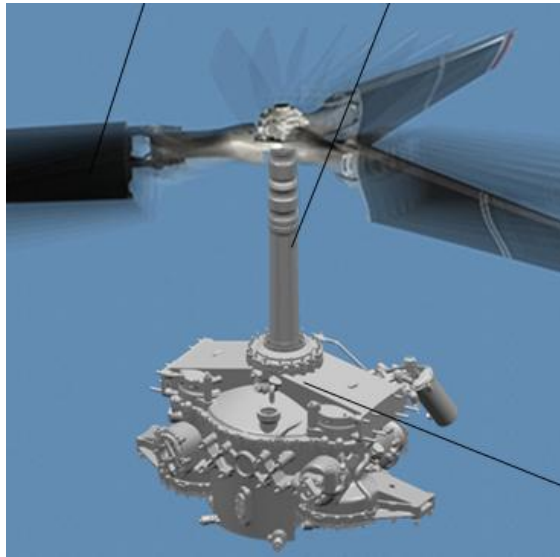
Schematic showing typical rotorcraft mast component, rotorcraft blades, and gearbox assembly
